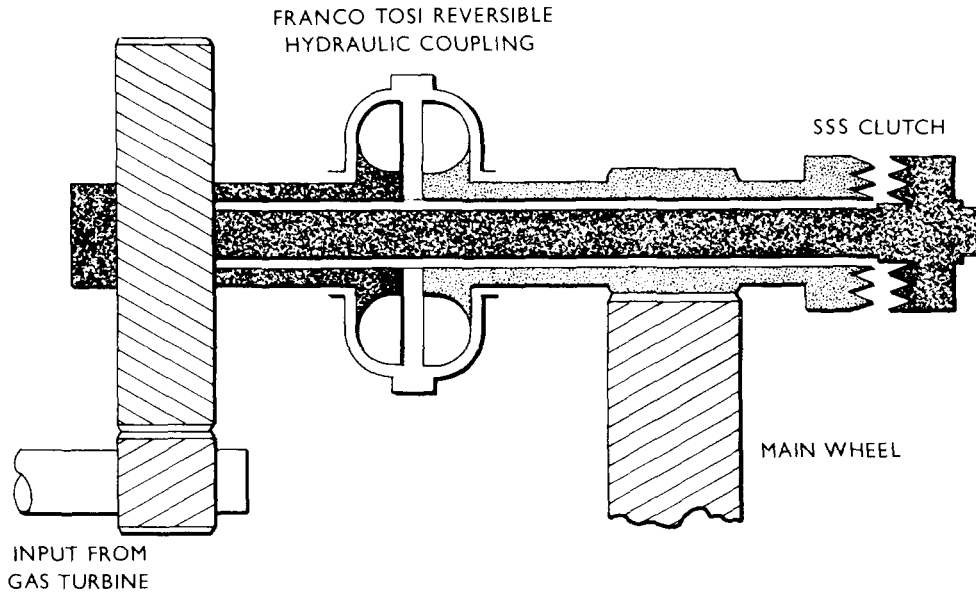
ARRANGEMENT OF FRANCO TOSI COUPLING IN THE 'GARIBALDI' GEARBOX
